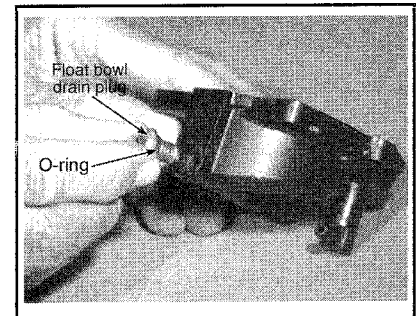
Remove the float bowl drain plug and discard the O-ring
